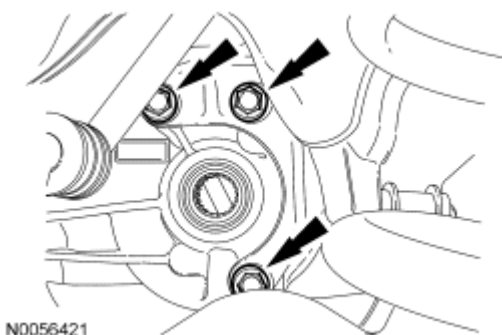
Locating LH Side Insulator Or Bracket-To-Rear Axle Differential Bolts
